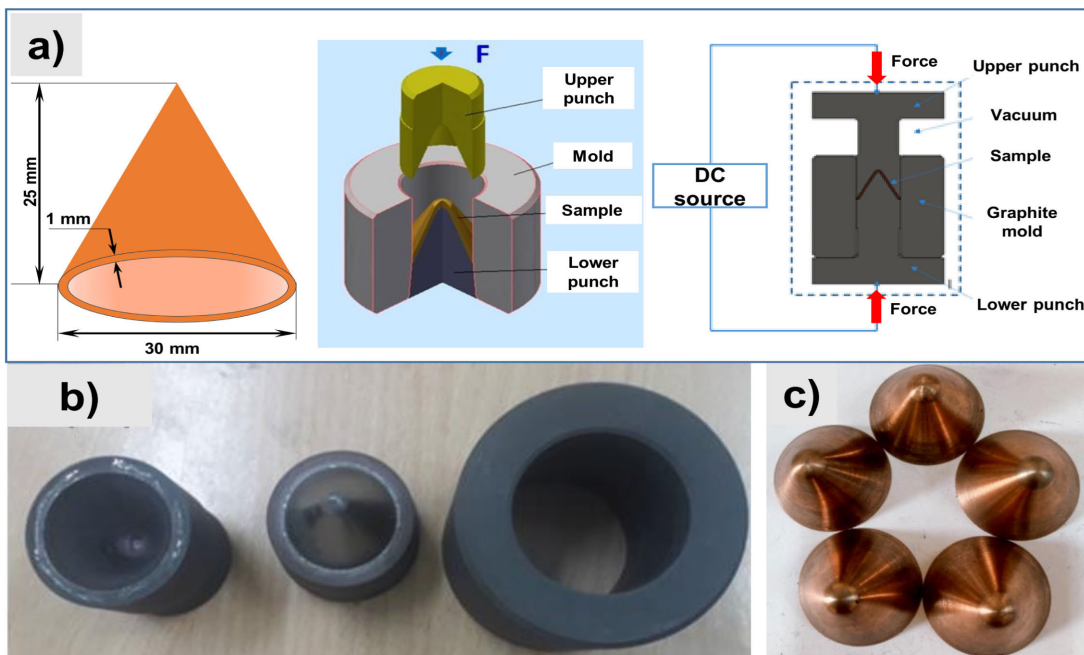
(a) The detail of shape and size, (b) graphite molds and (c) optical image of the fabricated conical-shaped W-Cu composite.
